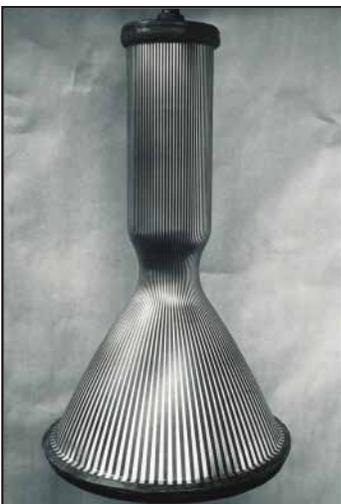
Channels machined in the metal liner of a rocket thrust chamber, for the NASA Space Shuttle.
